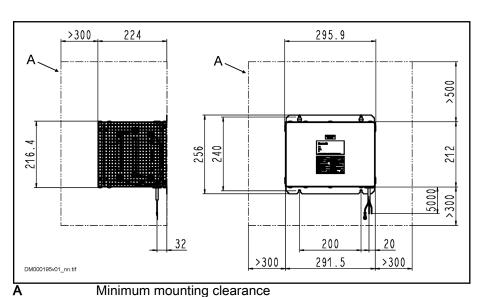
Dimensions (with suspended mounting on the wall)
